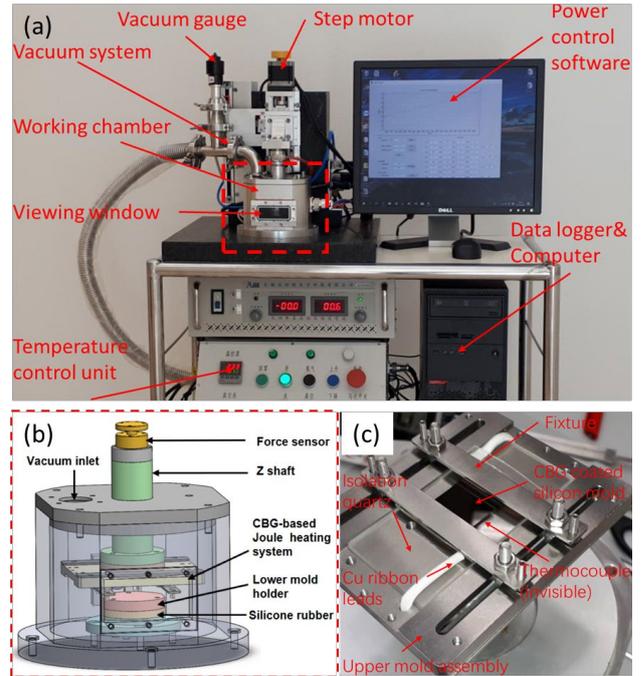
(a) The experiment apparatus and its main components, (b) 3D drawing of the working chamber, (c) the upper mold assembly equipped with the CBG-coated silicon mold.
